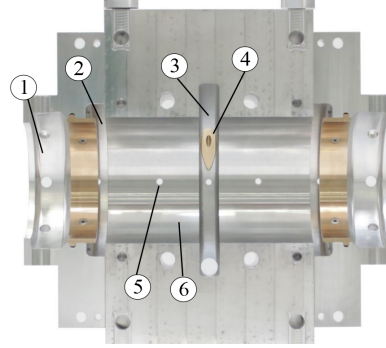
Cross section of the seal house. ① secondary discharge cavity, ② discharge cavity, ③ inlet injection cavity, ④ inlet nozzle, ⑤ pressure sensor, ⑥ seal surface. The figure is adapted from [21].
